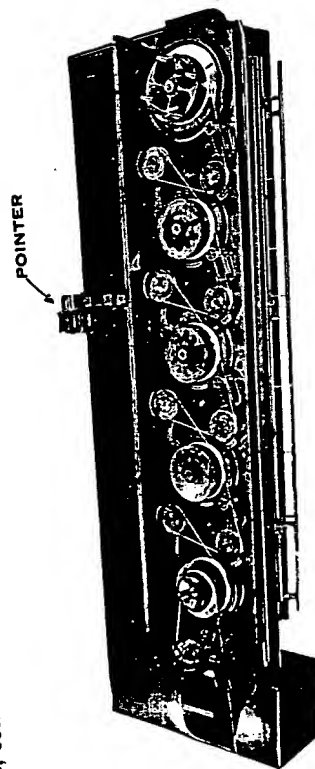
5/6 Motoblox threaded to show path of wire from block to block, with rear apron mounted pointer. (Courtesy Morgan Construction Co.)
